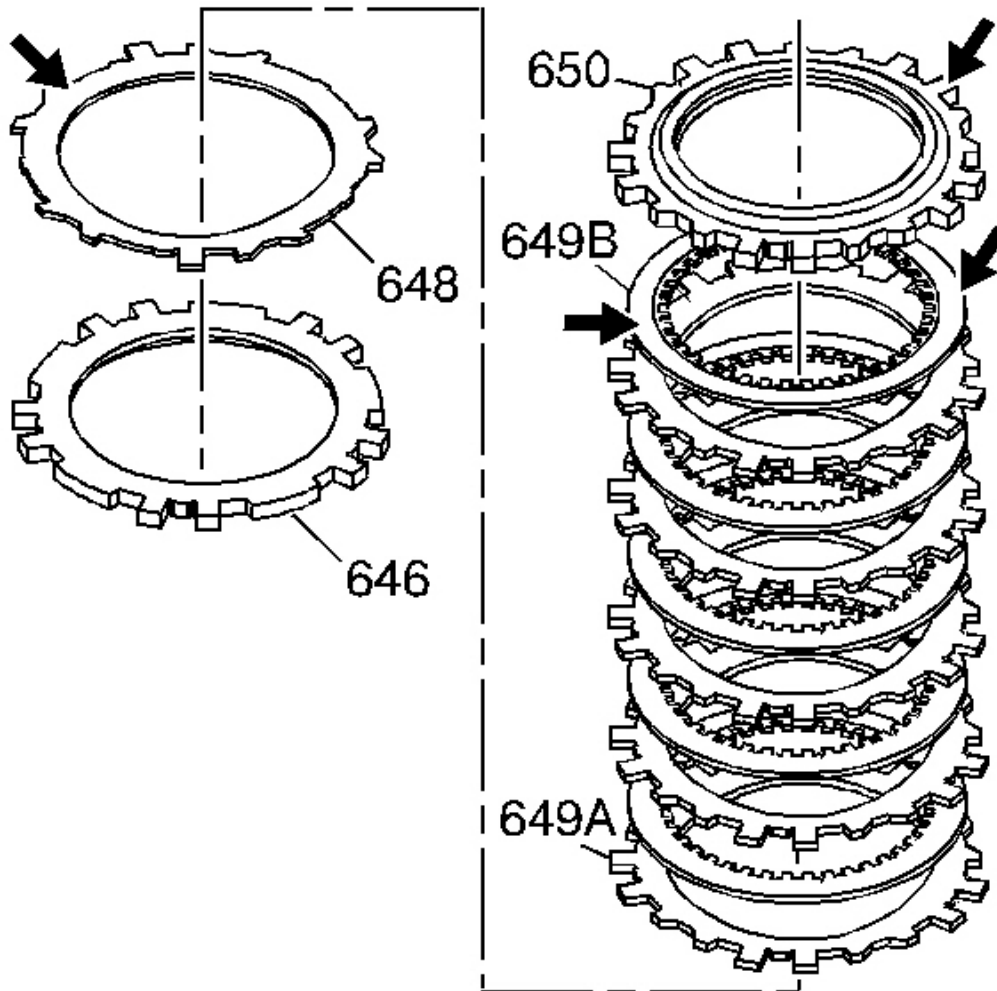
Inspecting Forward Clutch Assembly For Wear Or Damage
